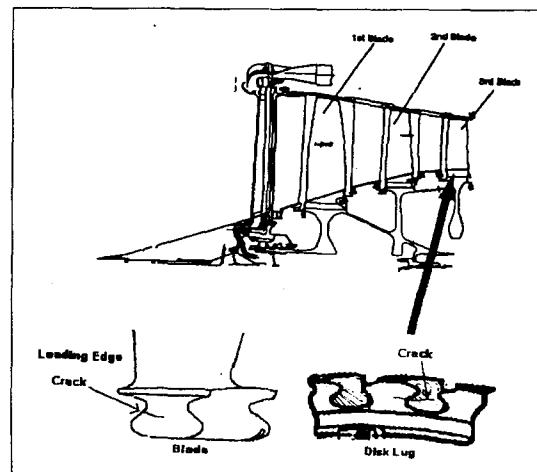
Inspected Fan Drum Rotor & #3 Blade Crack on 2nd AMT
